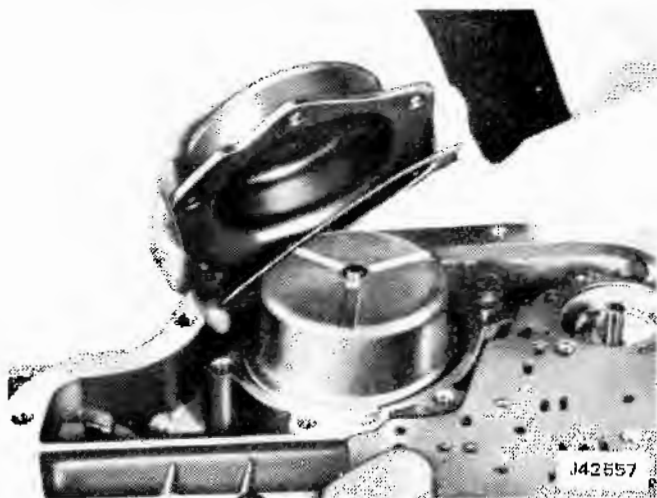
Installing Cover and Gasket Over Rear Servo Assembly
